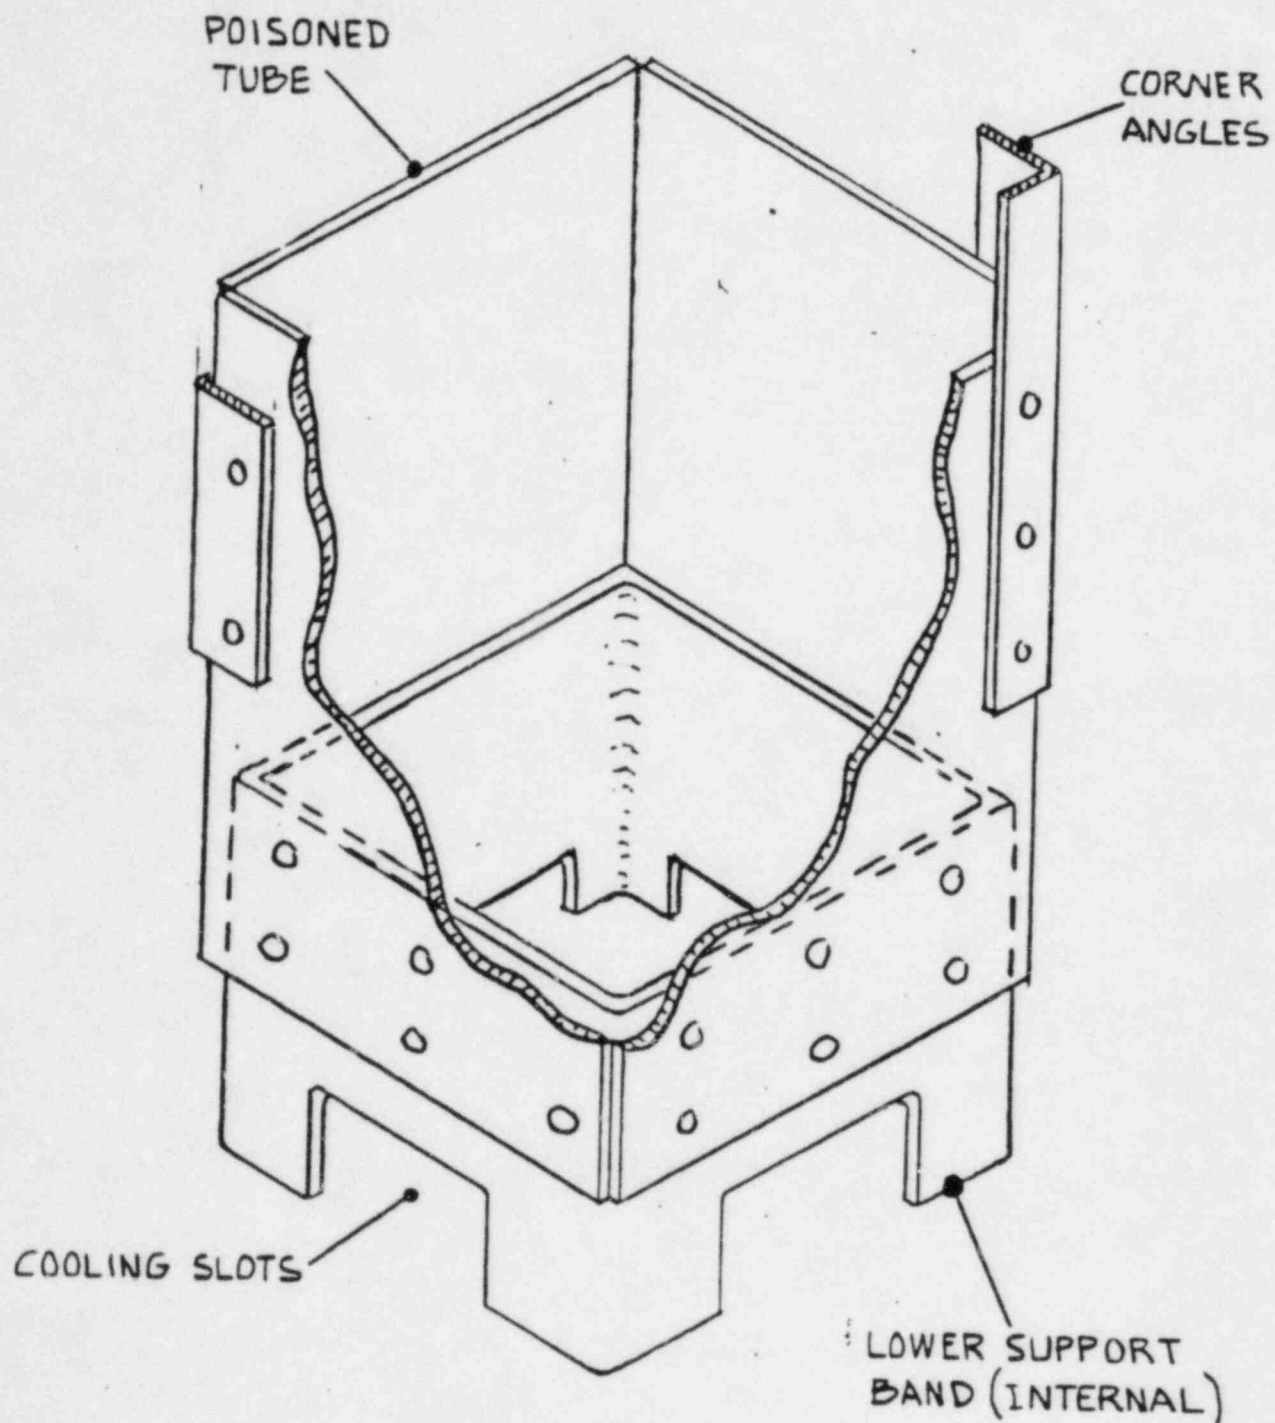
Fuel Assembly Protective Can (Lower View)
